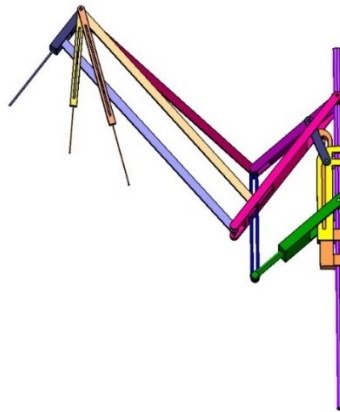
Fully folded view of the folding mechanism after assembly of the folding mechanism and the locking mechanism.
